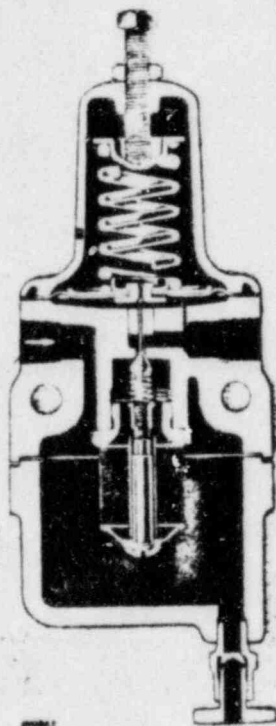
Sectional View of Type 67FR Showing Details of Filter and Internal Relief
